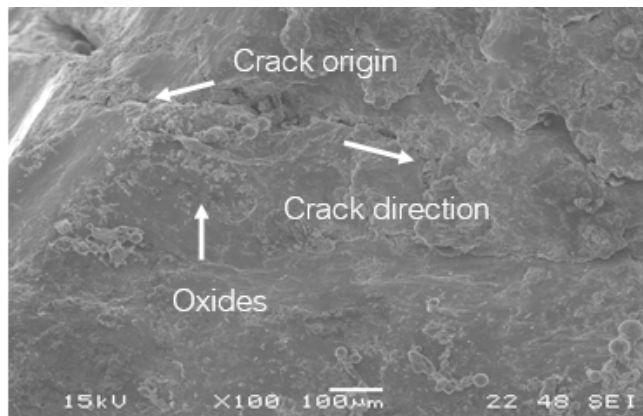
Fractography showing view of the crack origin and oxides
